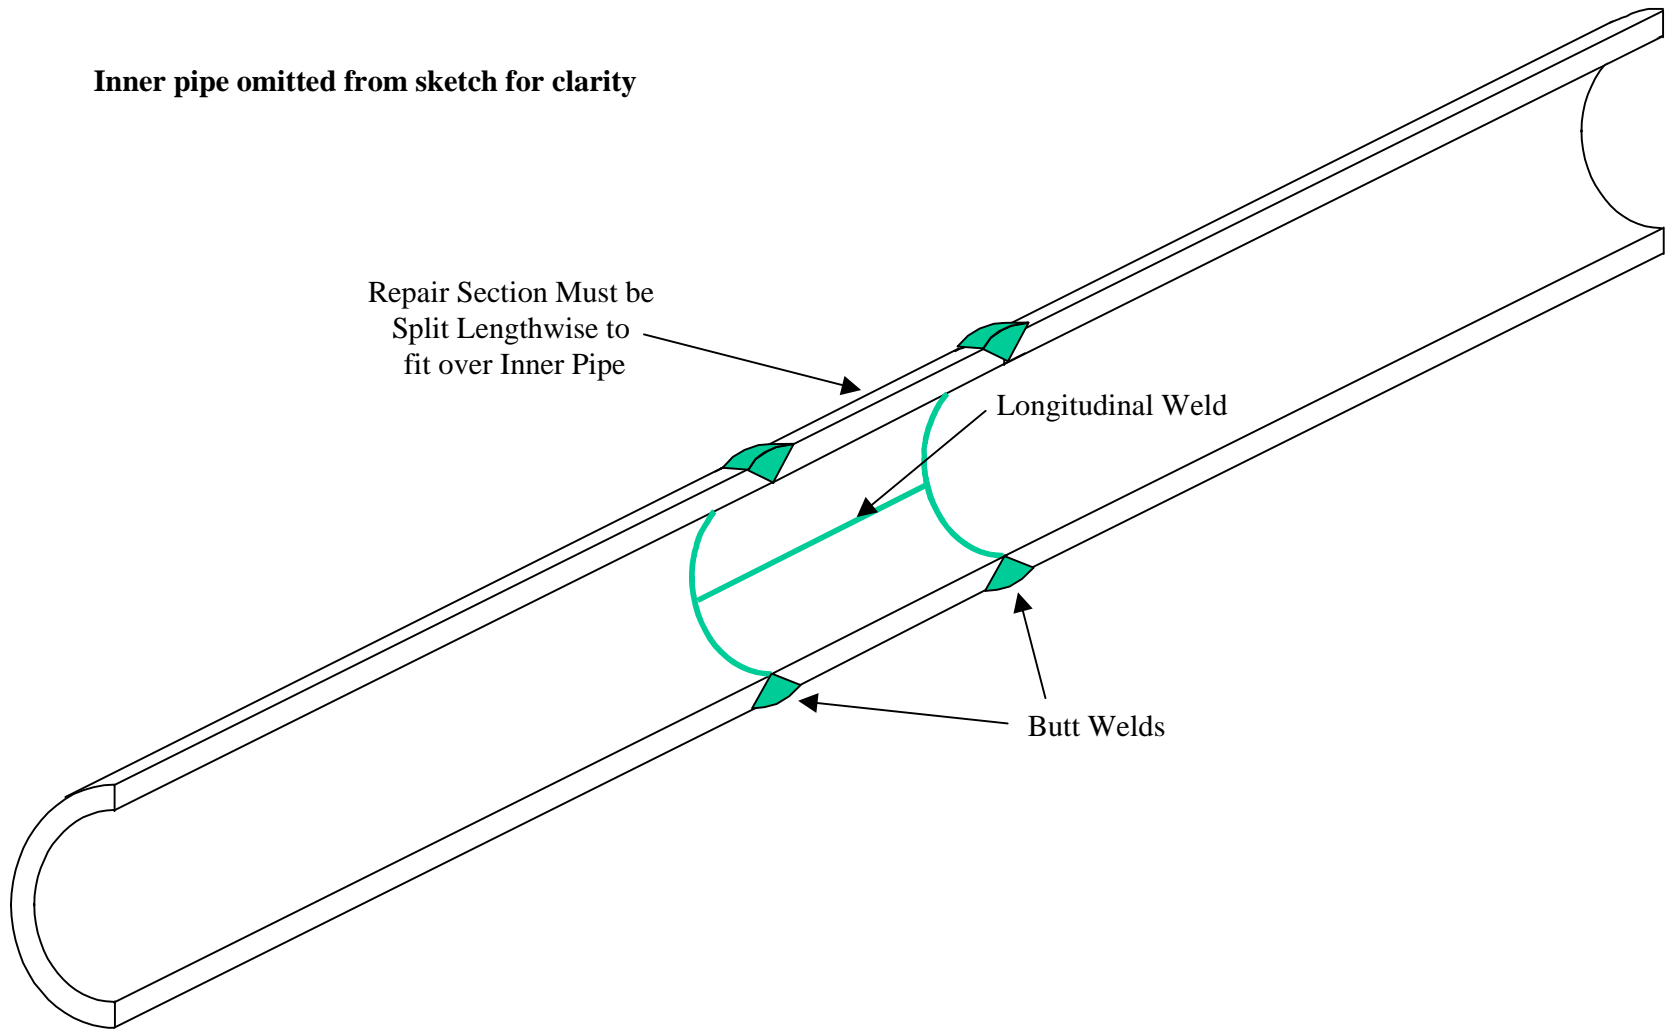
Butt Weld Repair of Outer Pipe: Pipe-in-Pipe Alternative
